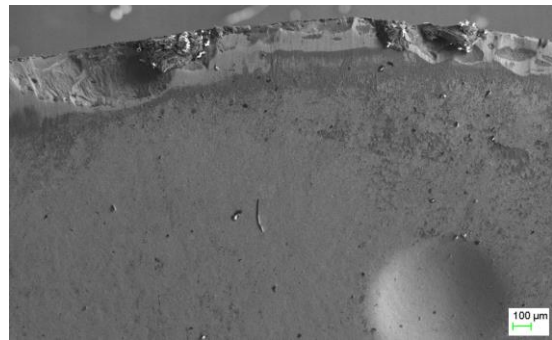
Different failure mechanisms of the rake face of the cutting tool inserts implanted at $1\text{E}+17$ ions/ cm^2 dosage.
